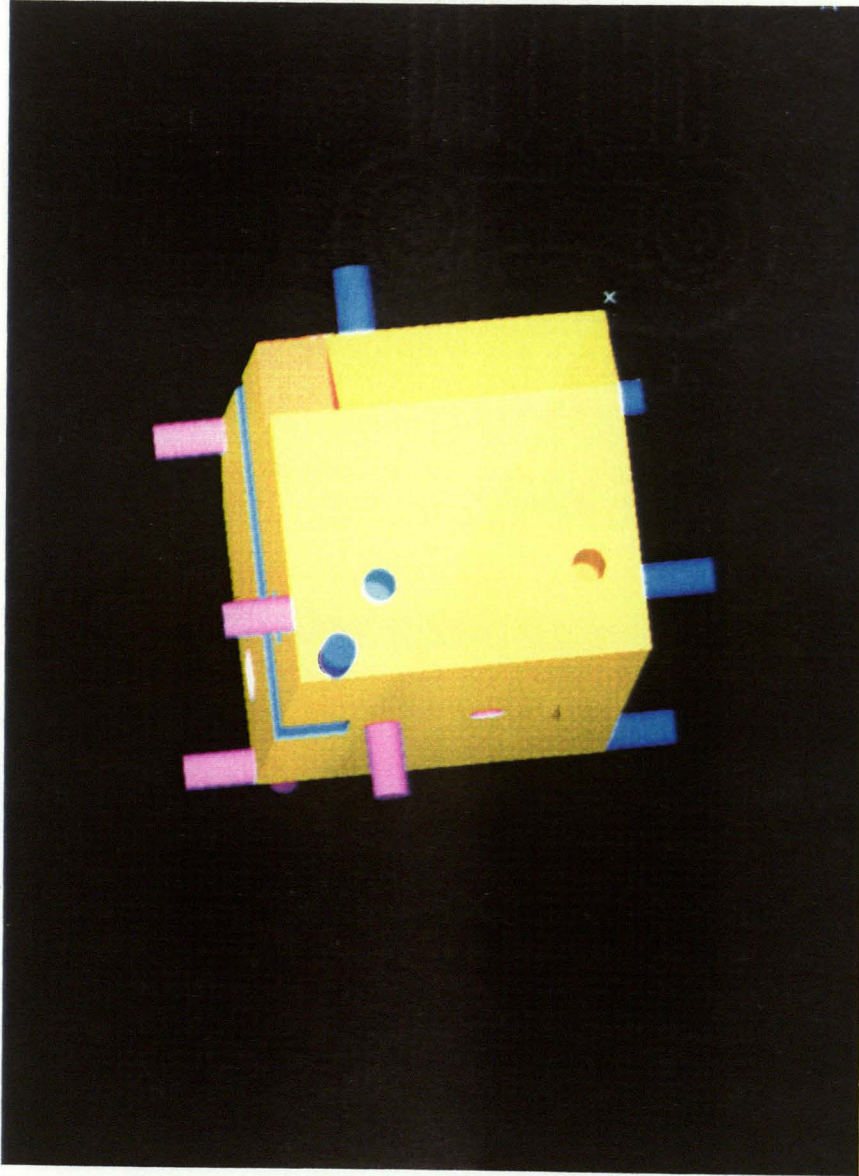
An isometric view of the workpiece with locators in blue and clamps in magenta
